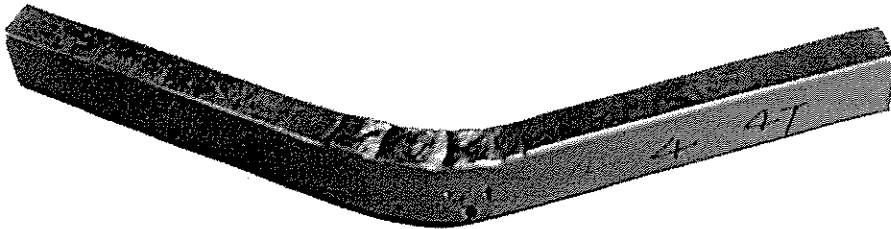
Side bend with porosities in the weld metal
